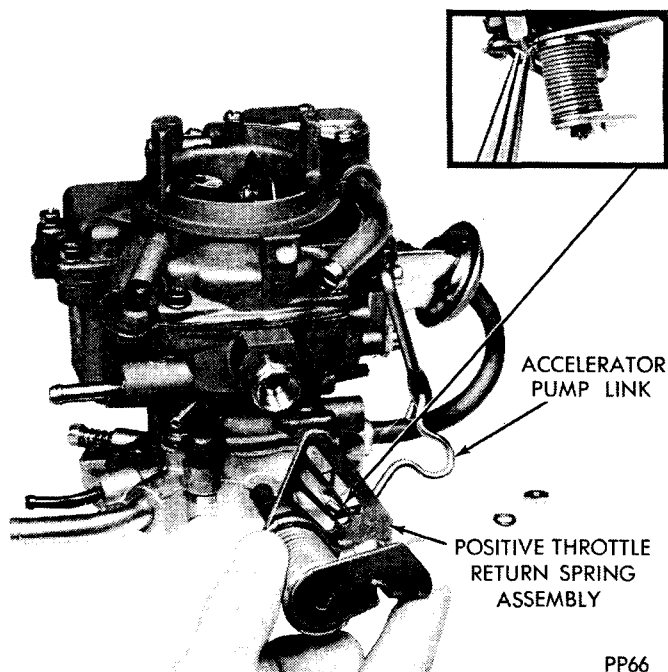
Removing or Installing Positive Throttle Return Spring Assembly
